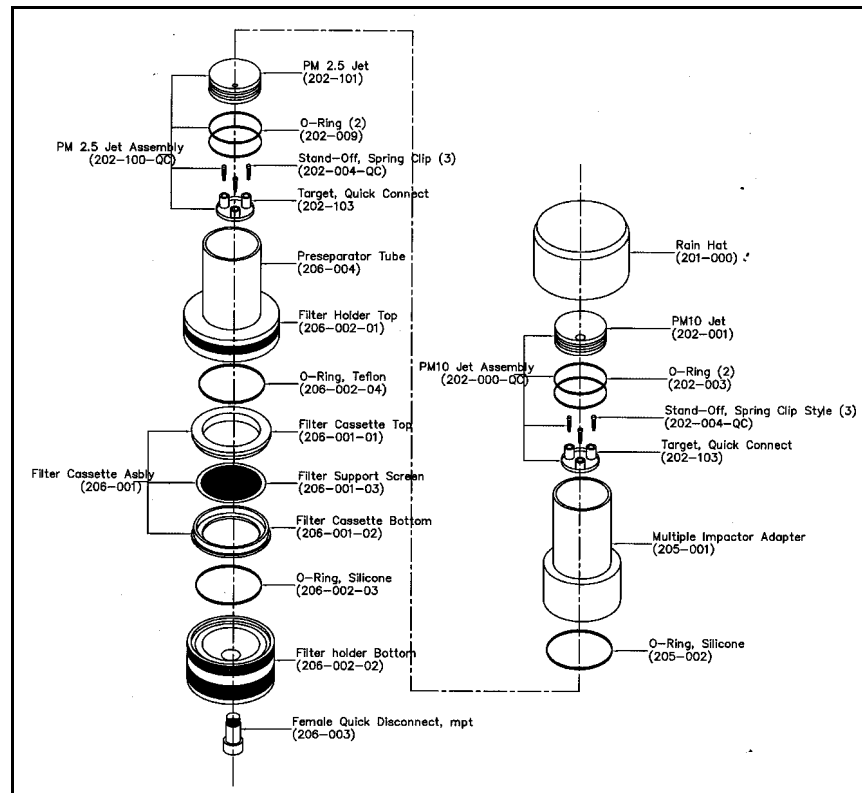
PM_{2.5} Preseparator and Filter Holder Assembly
